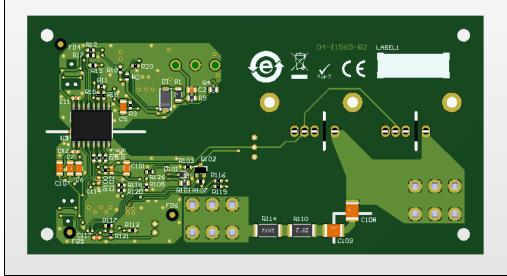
High-Voltage Auxiliary E-Fuse PCB Assembly (Bottom View).
